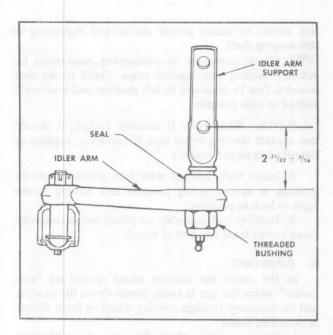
Proper Location of Idler Arm on Threaded Support Bushing, Except Eldorado
